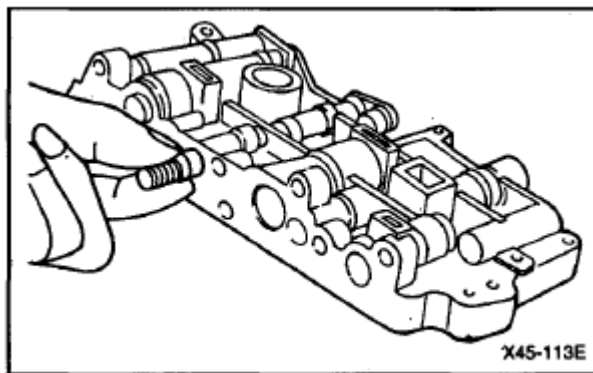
Removing/Installing Shift-Control Plug & Shift Control Spring
